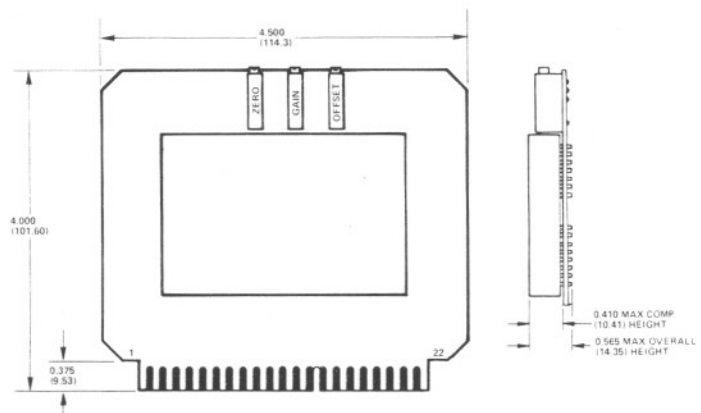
AC1520 mounting card outline dimensions in inches and (mm)
